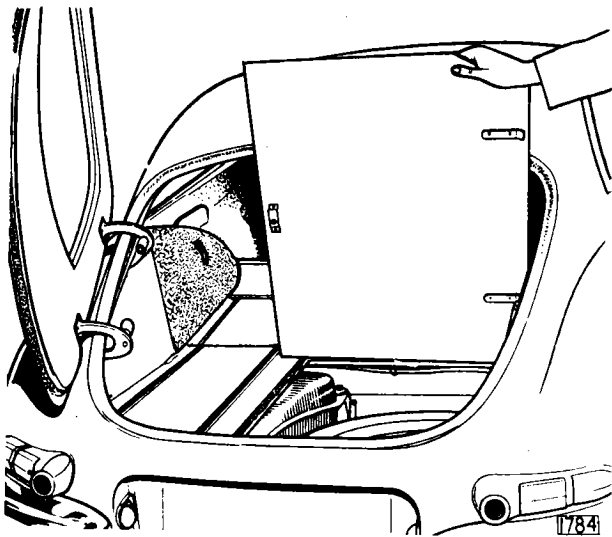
Spare wheel housing (Fixed Head Coupe)
